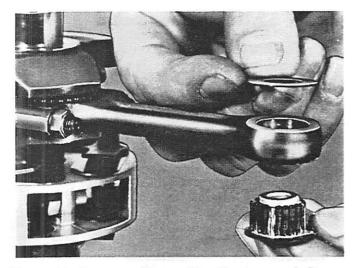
Inserting Piston Pin Bearings and Sleeve into Connecting Rod
